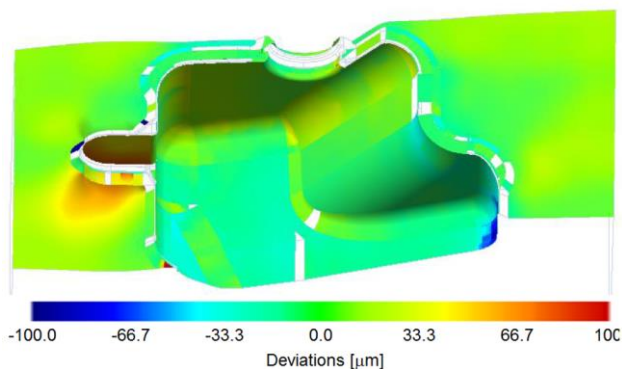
Scanned surface errors on the real workpiece finished with the initial interpolator setting. The presented colored areas are within the surface profile tolerance range of ± 0.1 mm.
